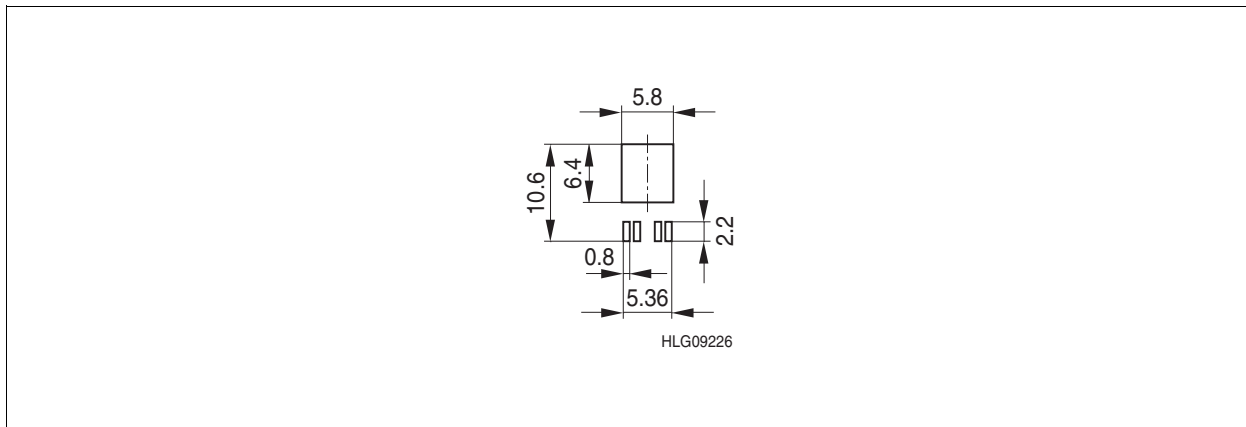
Footprint PG-TO252-5, Reflow Soldering Type
